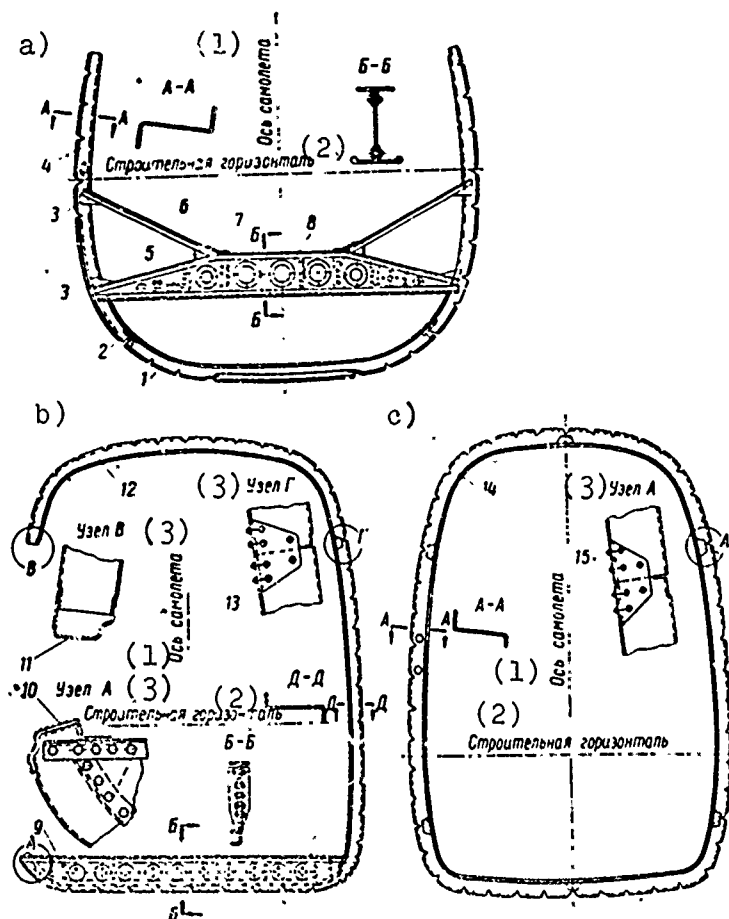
Standard typical frames No. 3 (a), No. 12 (b) and No. 19 (c): 1 - bottom part of frame; 2 - connecting angle; 3 - connecting knees; 4 - section of frame; 5 - corner plate; 6 - pressed angle; 7 - attachment corner plate of the cockpit floor panel; 8 - frame beam; 9 - bottom part of frame; 10 - threshold of cargo compartment door; 11 - edging of cargo compartment door; 12 - section of frame; 13 - connecting plate; 14 - section of frame; 15 - connecting plate.
